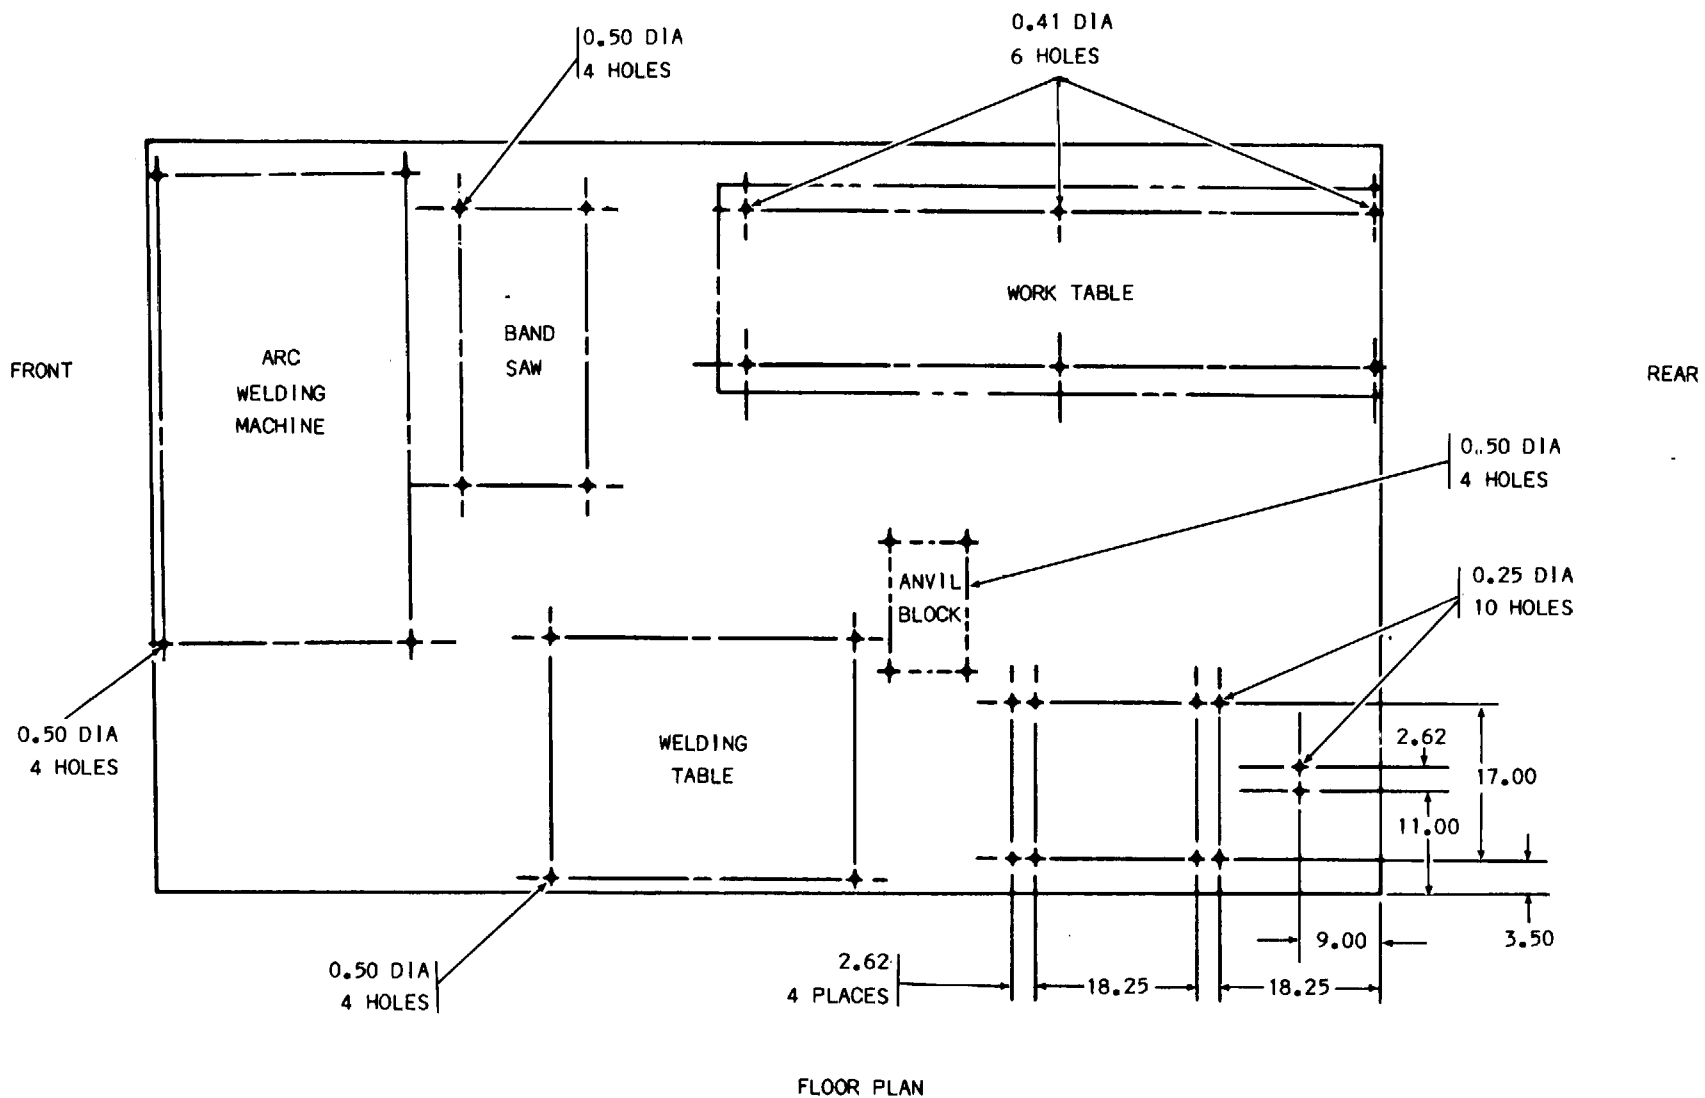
Dimensions for floor-mounted blind rivet nuts and equipment mounting holes, unit 1, 280, floor plan.
